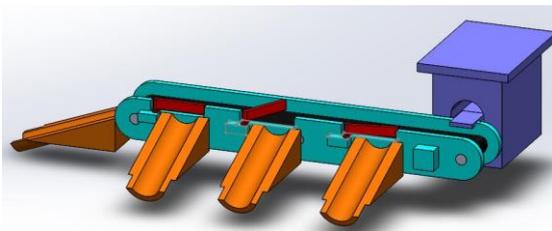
3D Design Model of the Egg Collection and Sorting Machine
